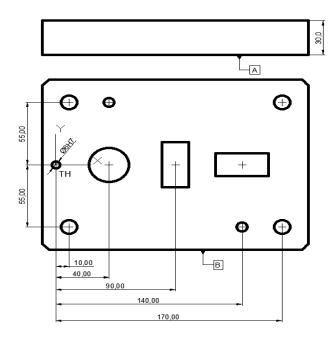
Dimensioning hole or profile centers from tooling hole centre
